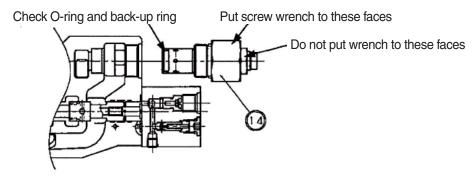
Check valve (Swing & boom swing, dozer, arm 3 & boom 3, service, arm, boom, bucket, arm 2)
